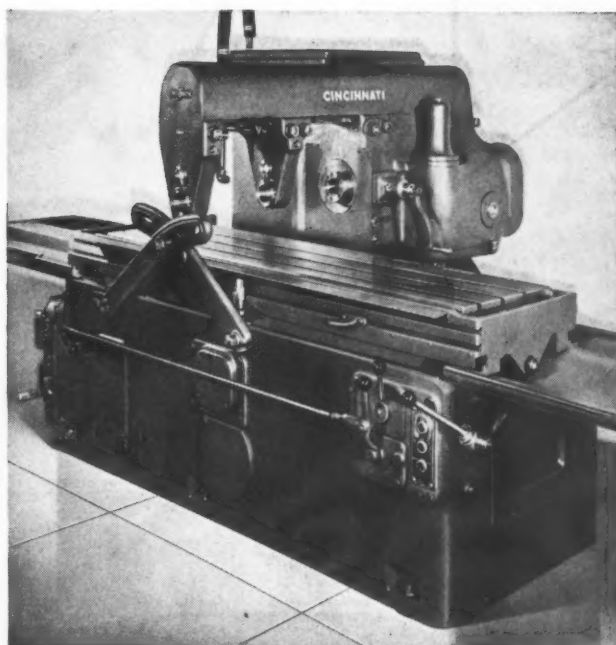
Cincinnati Plain Hydromatic Milling Machine
